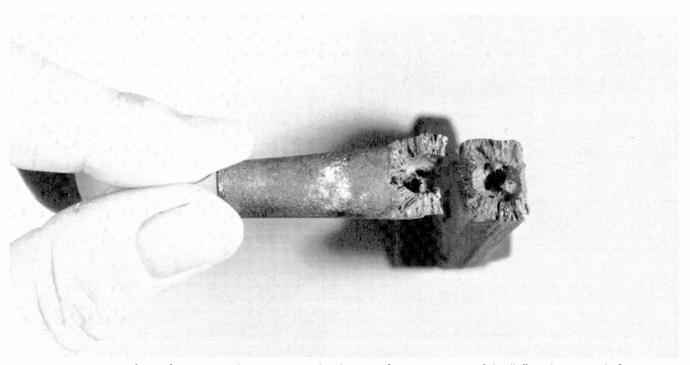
Fracture Surfaces of Figure 22 Showing Large Shrinkage Void at Intersection of the "T" to the Main Shaft Causing a Reduction in the Effective Cross Sectional Area.
